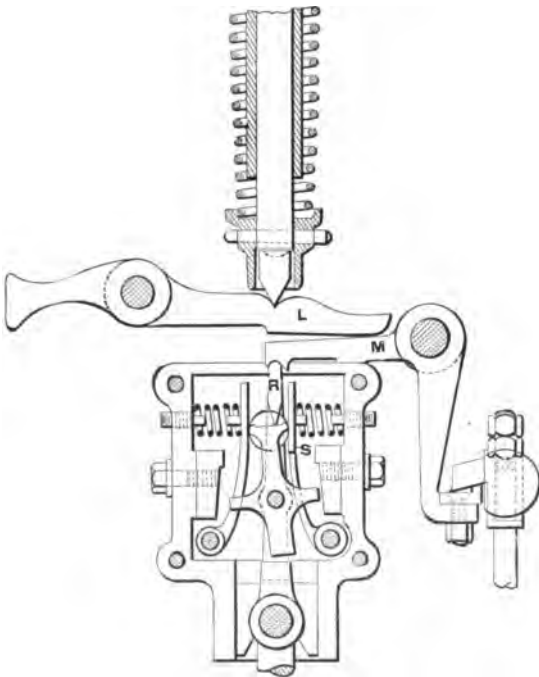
VALVE GEAR DETAIL OF CAPITAINE ENGINE.
